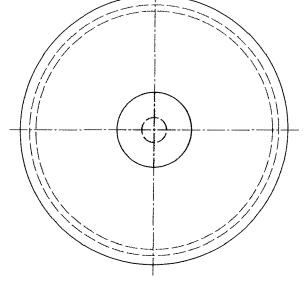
and 4: Centering frame ZG-ZR-NA/SA (2 designs) Drawing no. 1-090-109-00-00
